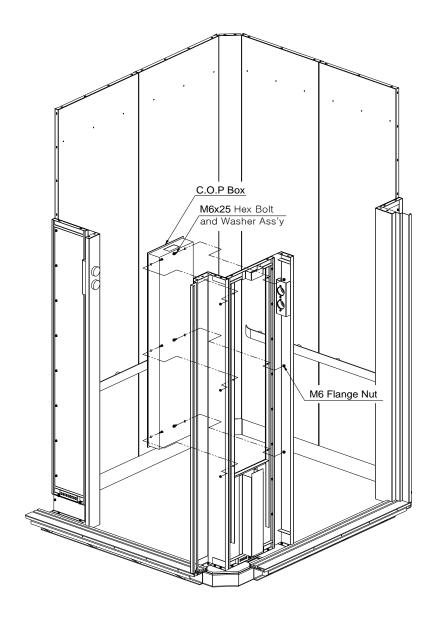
E. C.O.P BOX ASSEMBLY (CORNER POST)
